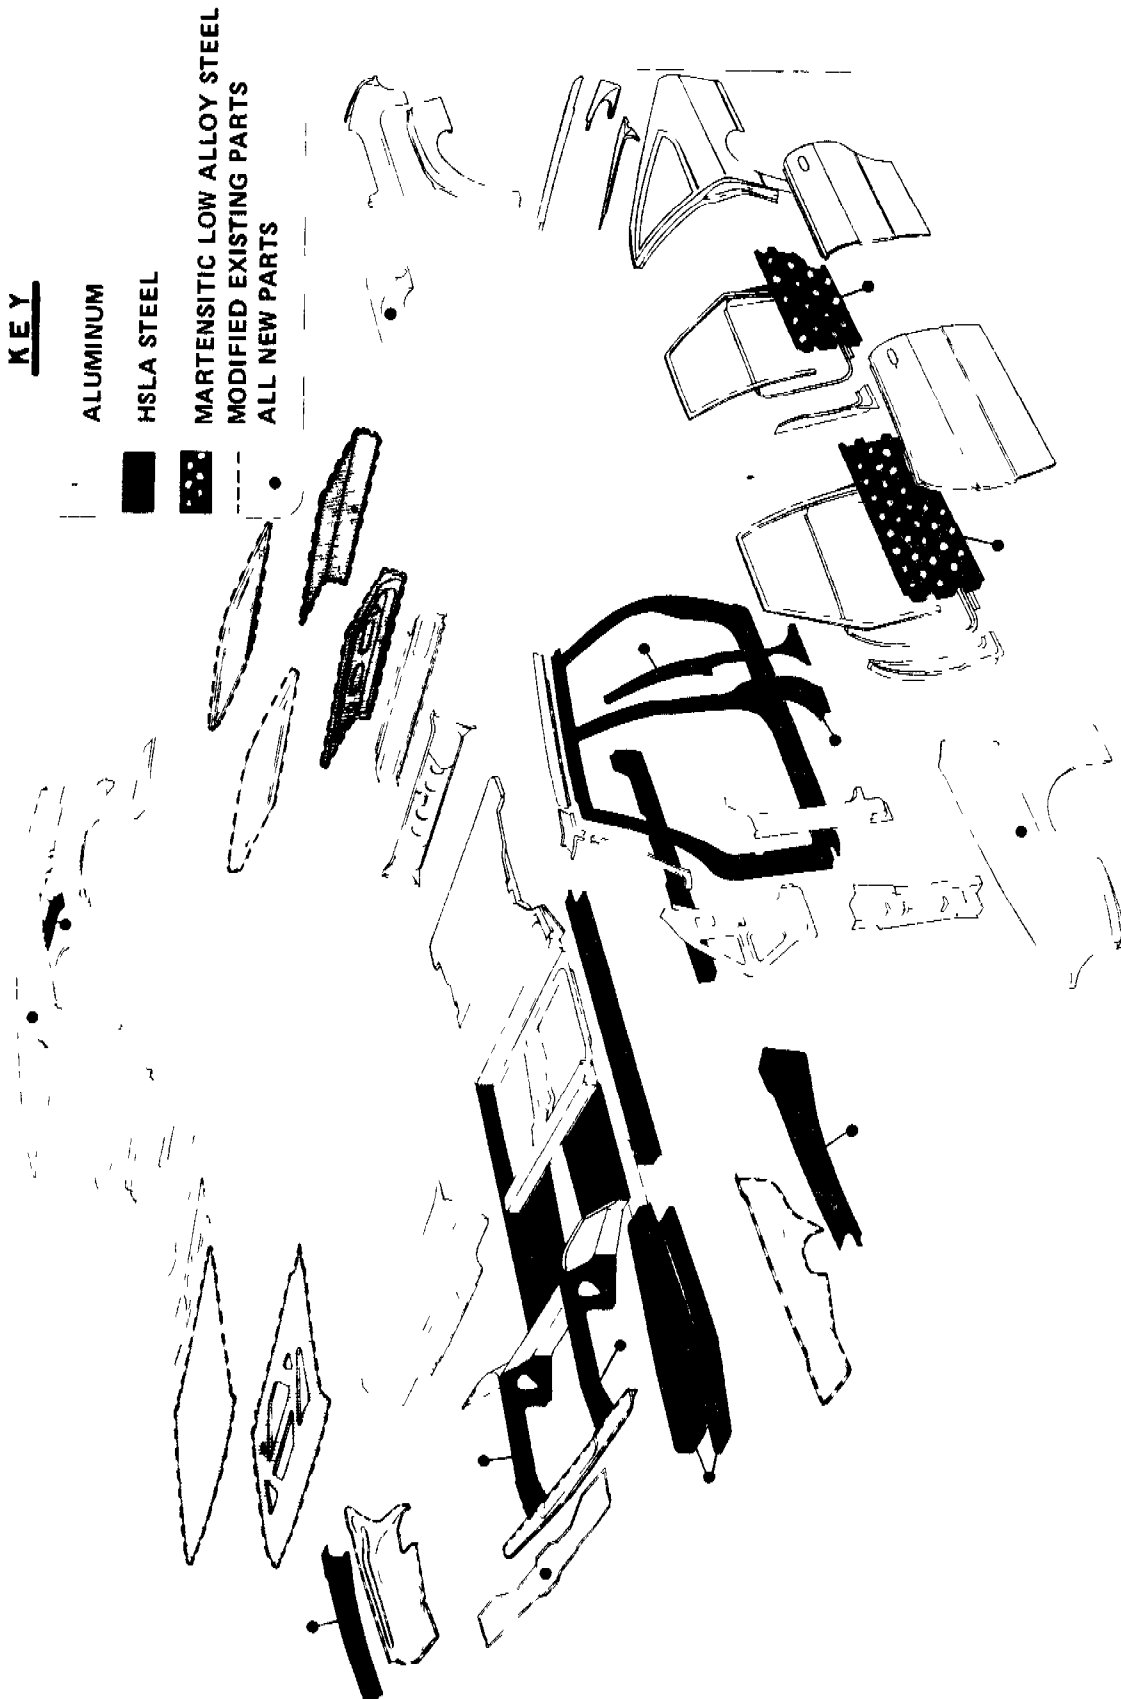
EXPLODED VIEW OF C-6 BASE VEHICLE INDICATING MATERIAL
